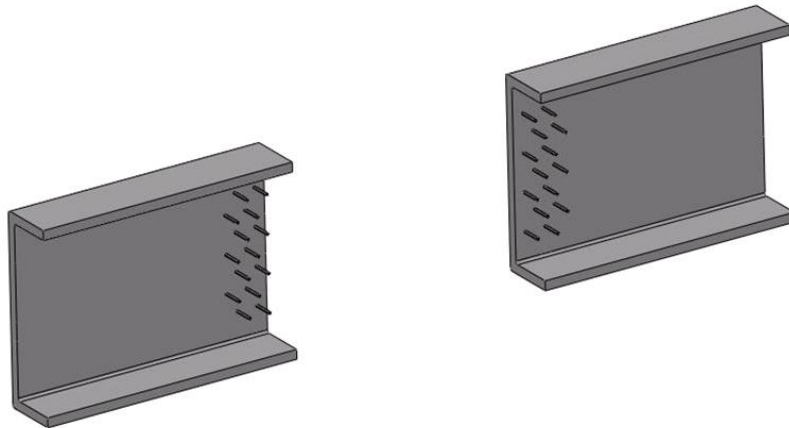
Scheme of the friction riveted GFRP elements.
